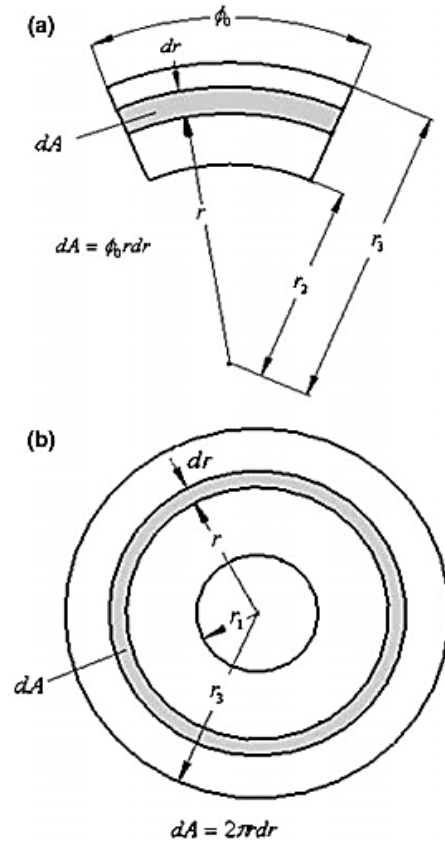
CONTACT SURFACE ELEMENT OF THE BRAKE PAD AND DISK COMPONENTS
